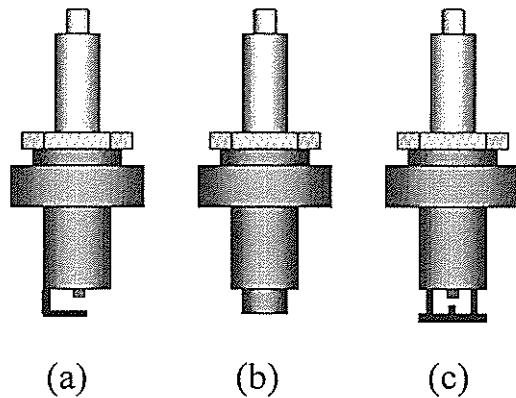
Figure of normal plug (a), cylindrical flanged plug (b) and disk flanged plug (c).
